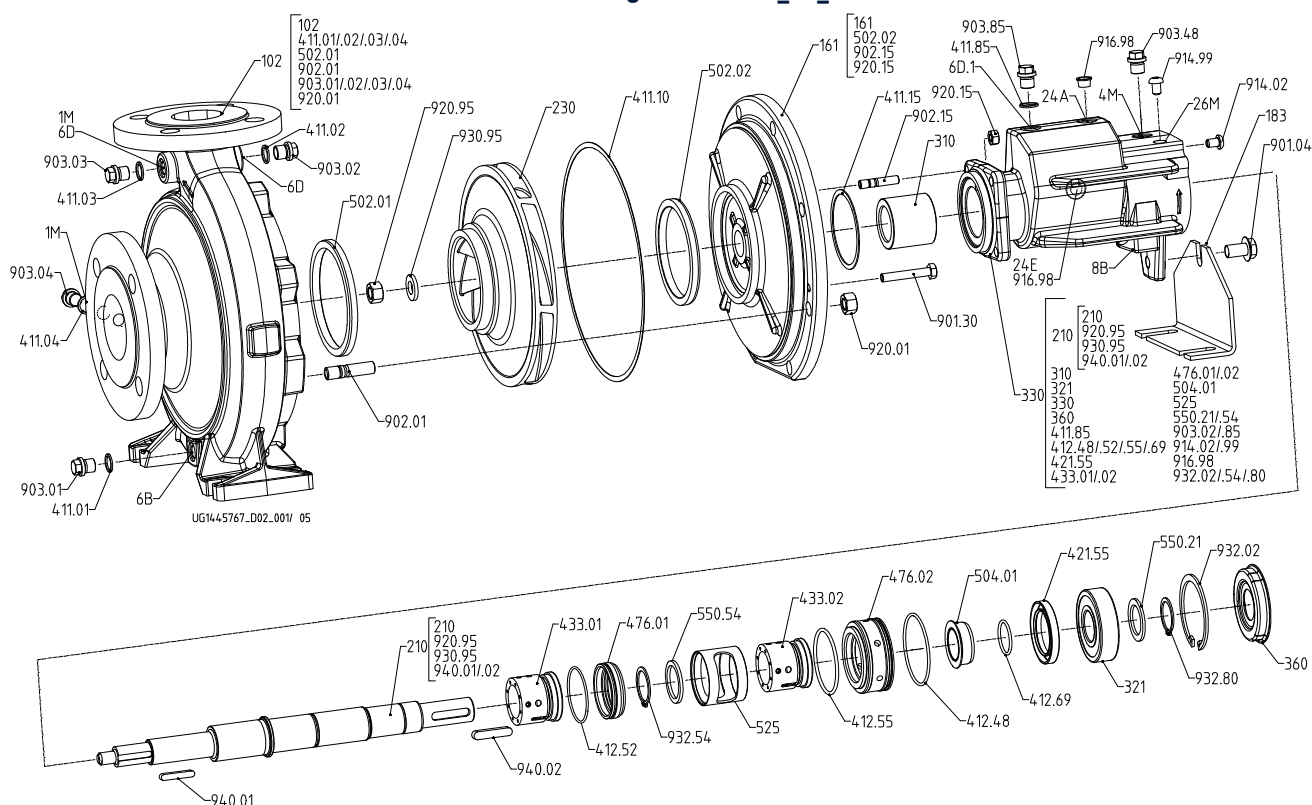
Exploded view of Etanorm SYT; bearing bracket WS_25_LS with double mechanical seal
